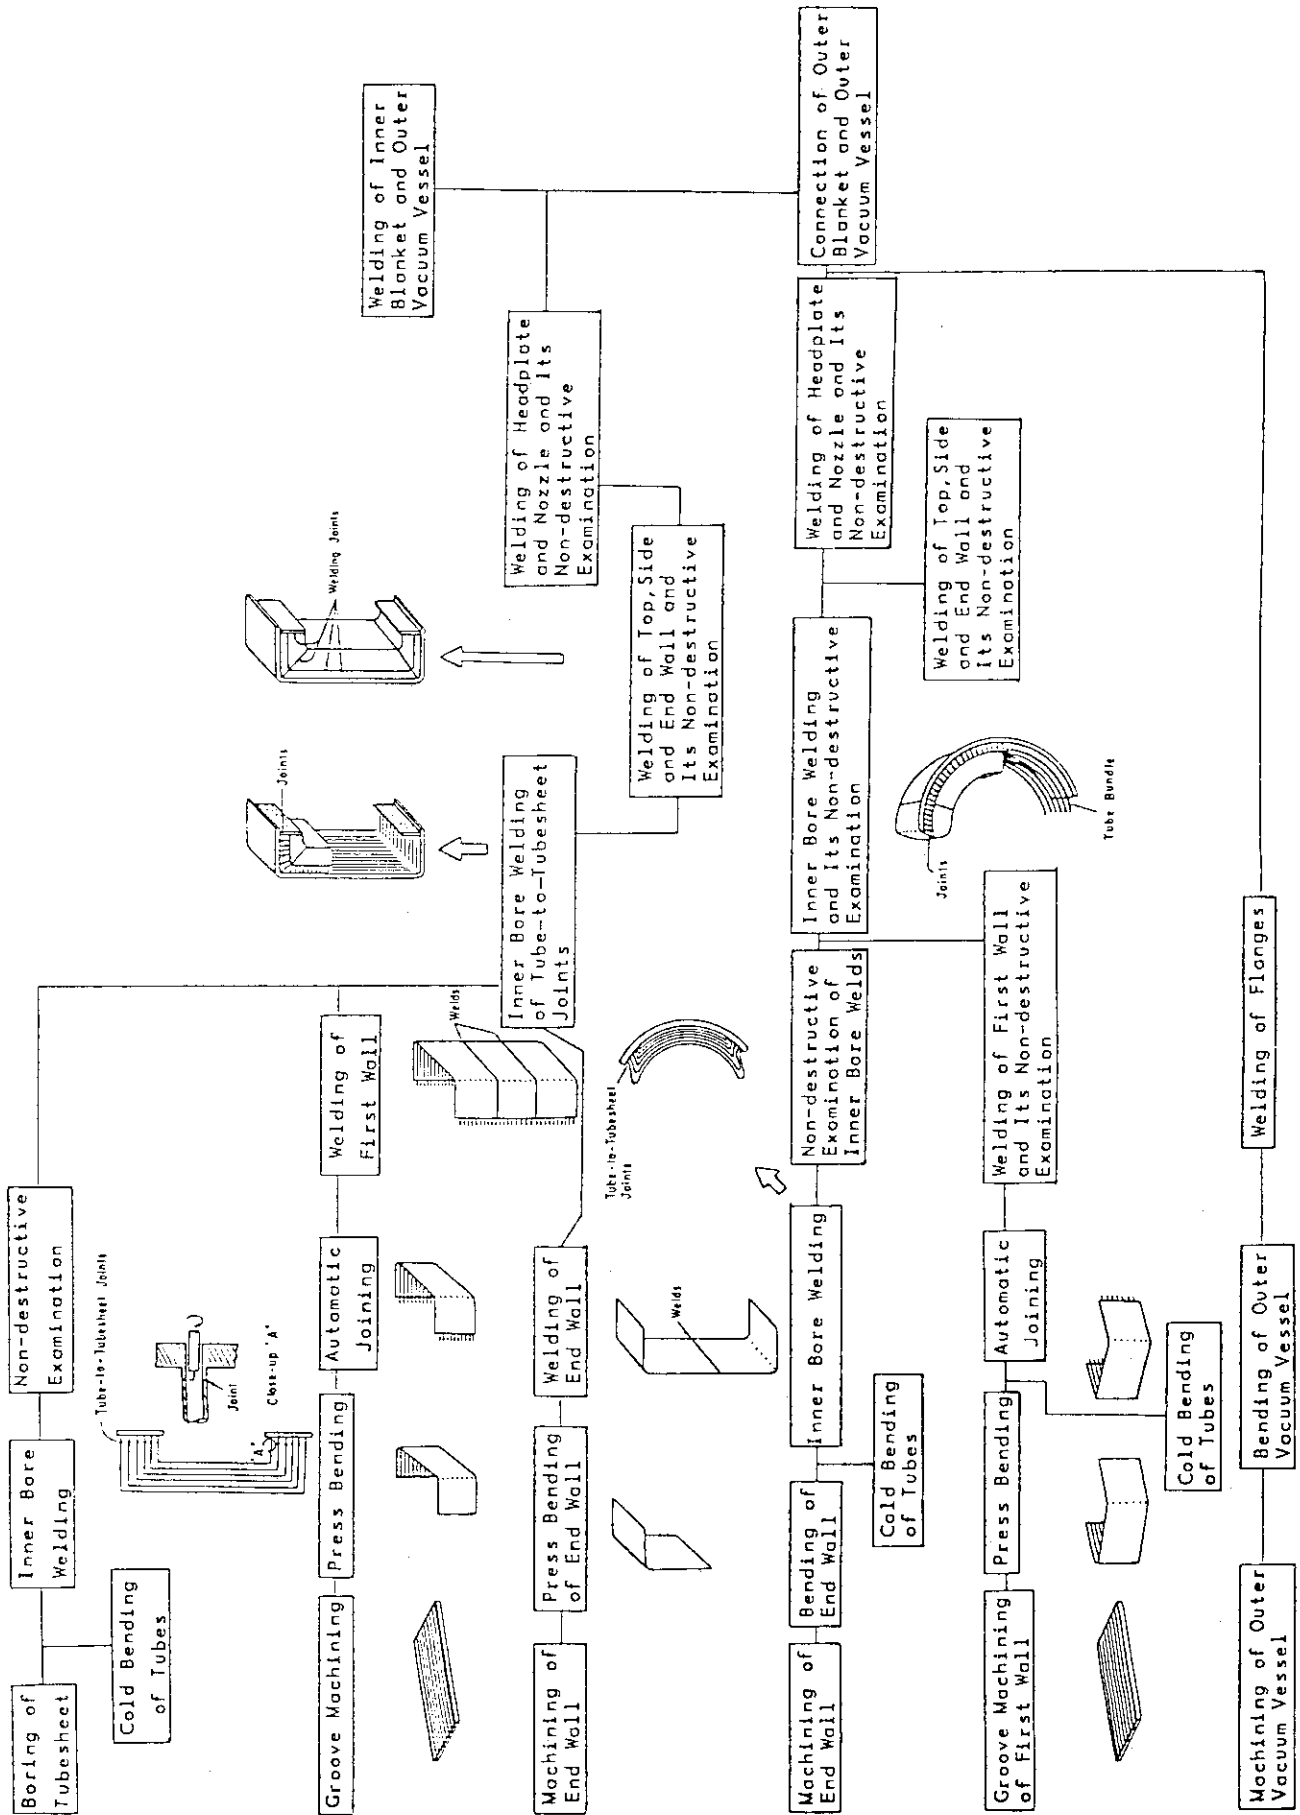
Fabrication Sequence of Blanket and Vacuum Vessel
